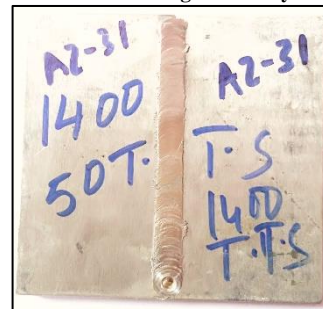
The weld was made at 1400rpm at 50 tool traverse speed with similar welding Az31 alloy
